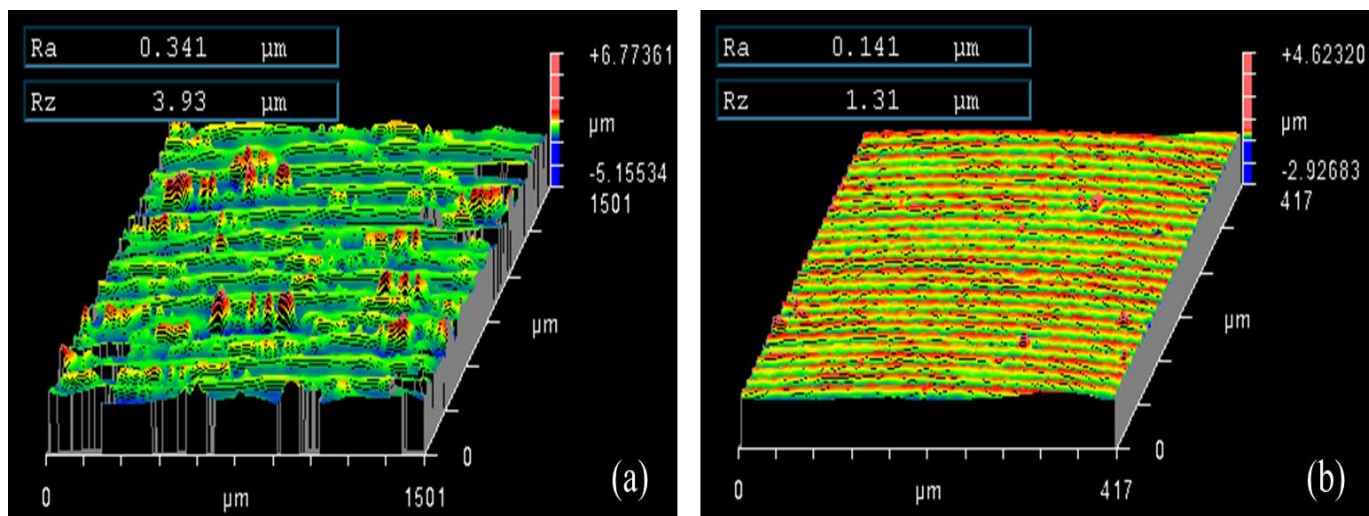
Three-dimensional surface profile images of the machined surfaces at optimum process parameters with a) 0.4 mm and b) 0.8 mm cutting nose radius.
